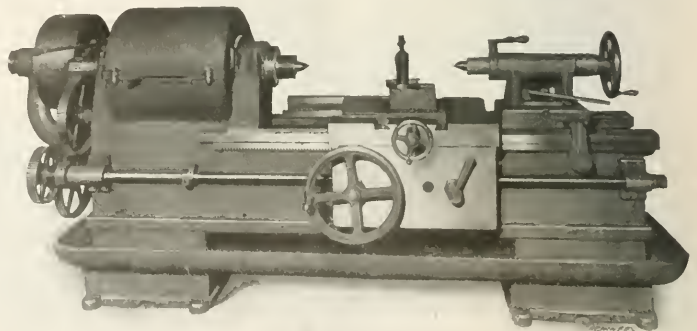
Heavy-duty 22-inch Single-purpose Lathe built by the General Ordnance Co.
